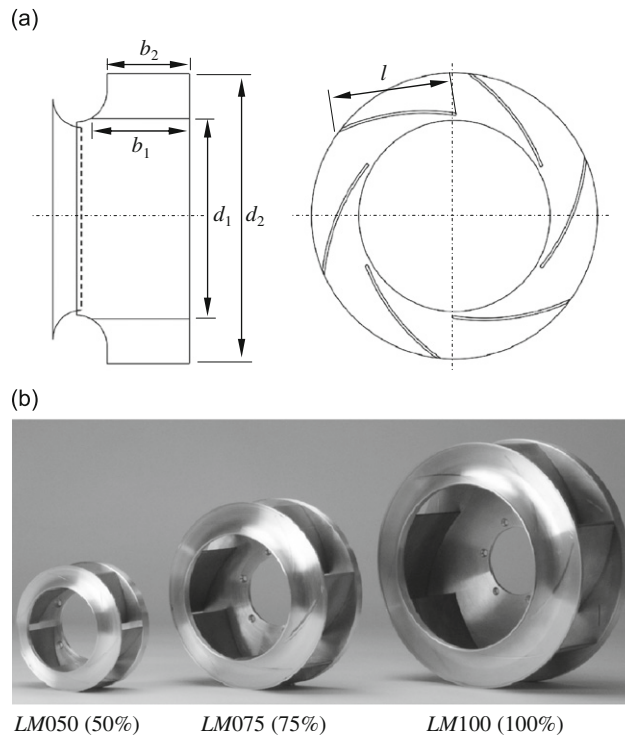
(a) Impeller geometry and (b) the three geometrically similar impellers manufactured.
